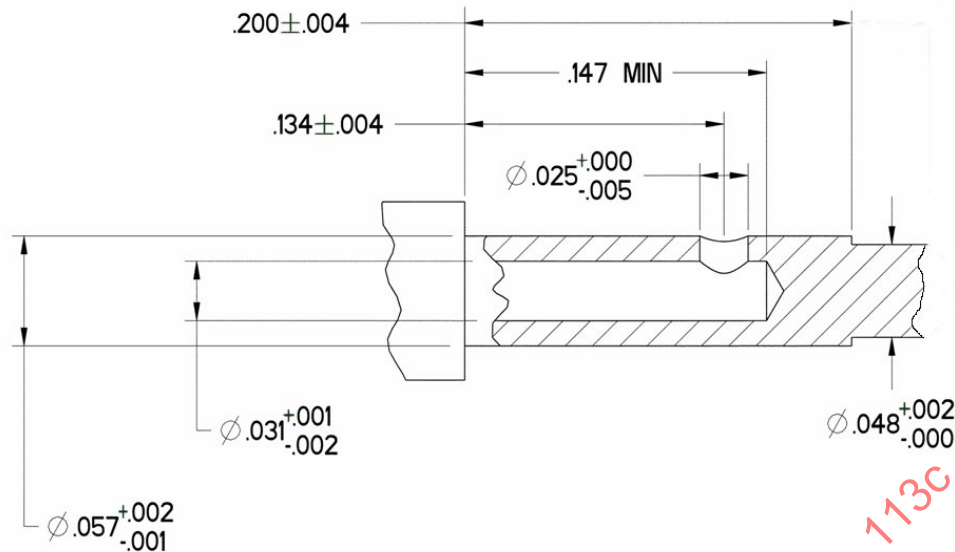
BIN CODE 625: UNASSEMBLED CONCENTRIC TWINAX CENTER CONTACT PIECE PART - CRIMP AREA DETAILS (SEE REQUIREMENT 1)
